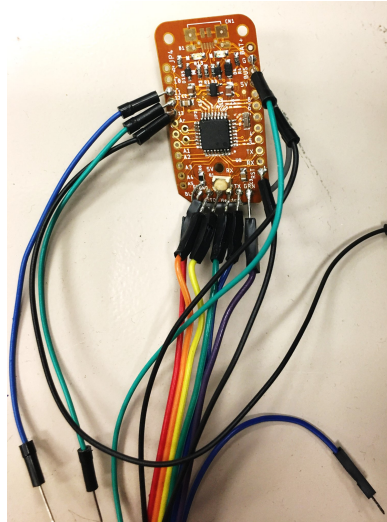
Our customized PCB board design and final board fabrication. All operations, from board design in EAGLE to chemical etching and final soldering, are performed in-house (done in the lab). The PCB now functions flawlessly and can be wrapped around the robot's head.
